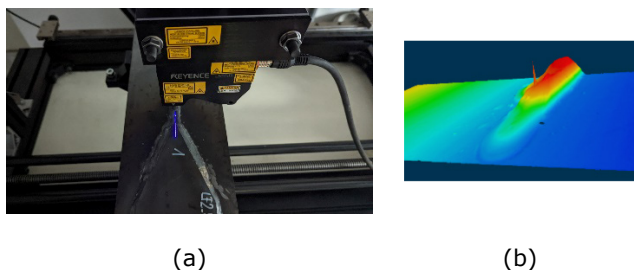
Measurement of the weld profile by line laser: (a) measurement setup, (b) exemplary profile geometry
